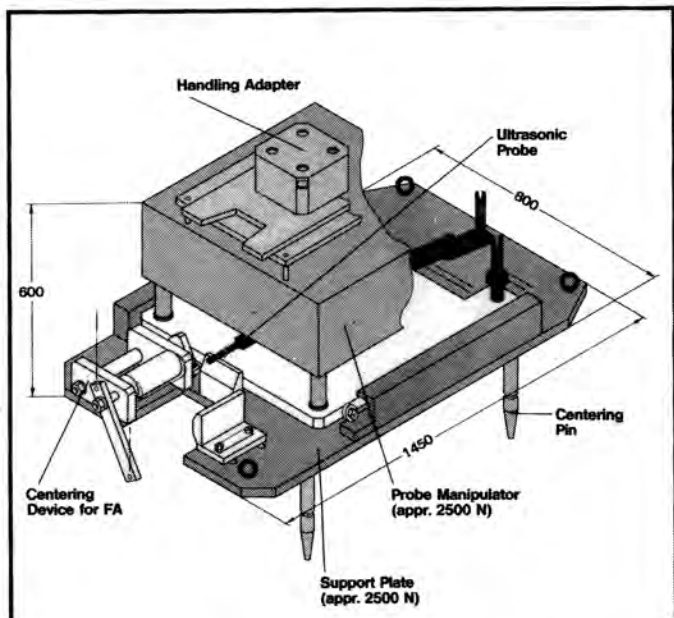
FFRDS - Testing device, manipulator with support plate.
